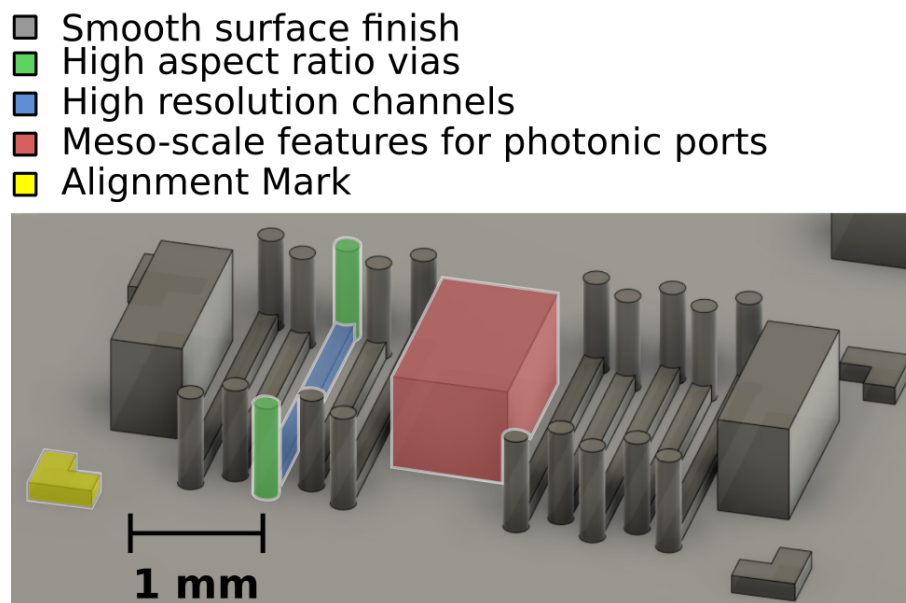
3D printed mold model for 10 channel device with 20 vias, 3 photonic ports, and alignment marks.
